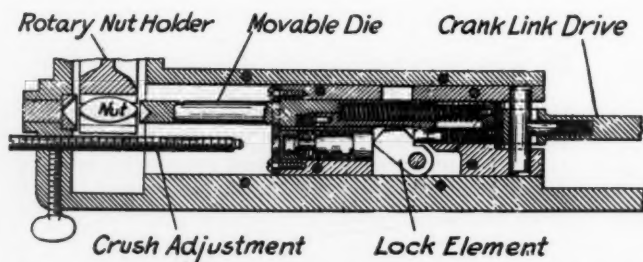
Device has self-adjusting mechanism to deliver measured cracking force
